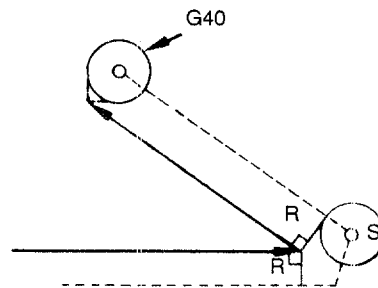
Straight-line to Straight-line at Outside Corner
